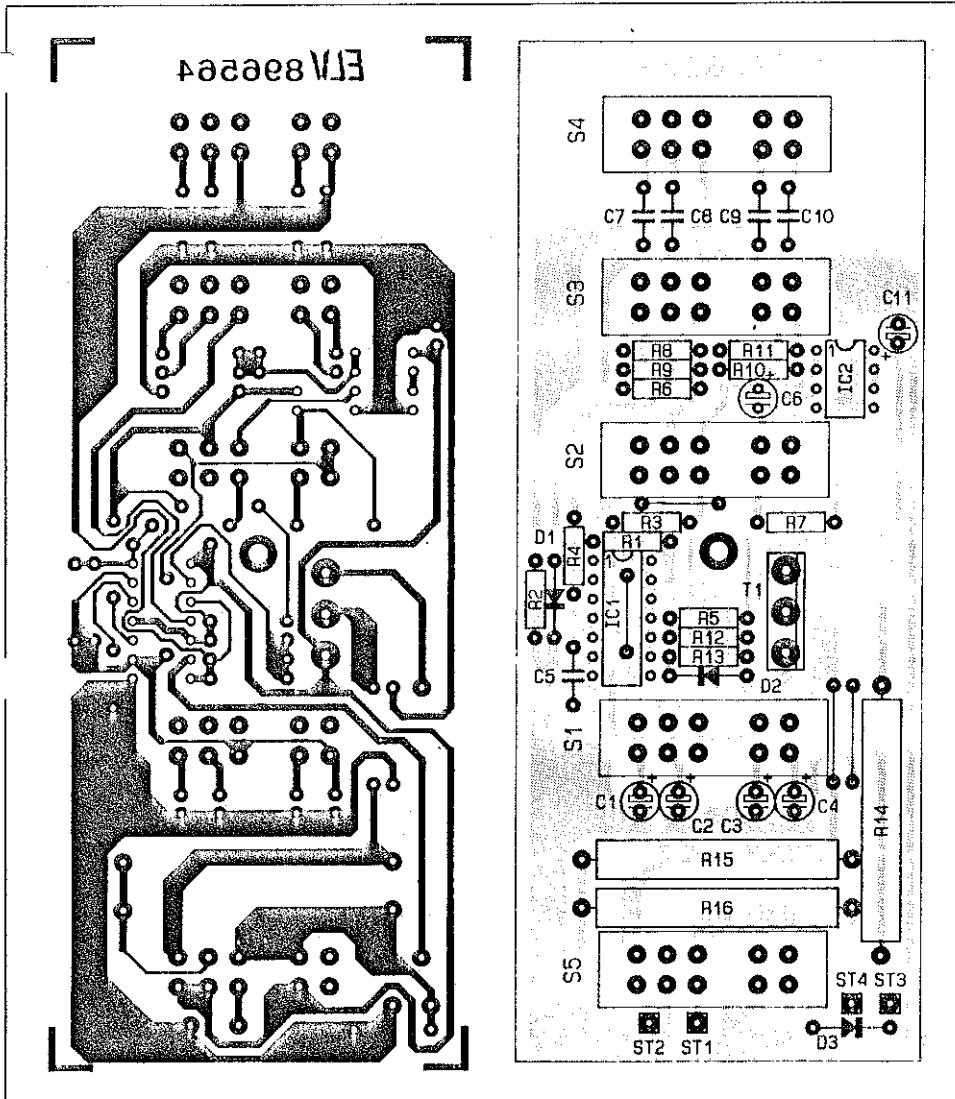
Track lay-out and component mounting plan of the PCB for the sound generator.
